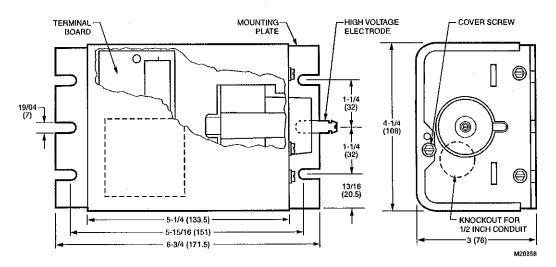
Q624A Solid State Spark Generator dimensions in in. (mm).
